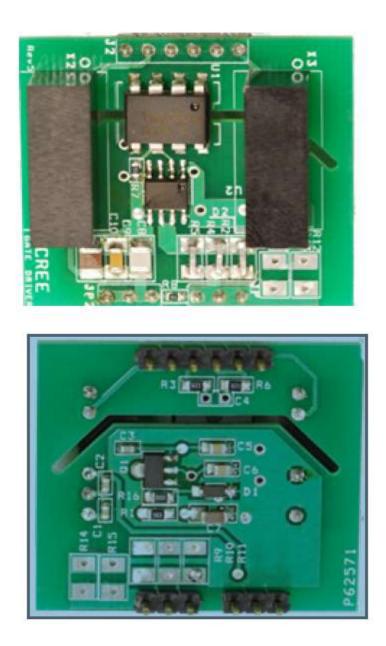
CRD-001 SiC MOSFET gate driver from CREE, Top view (upper) and Bottom view (lower)
